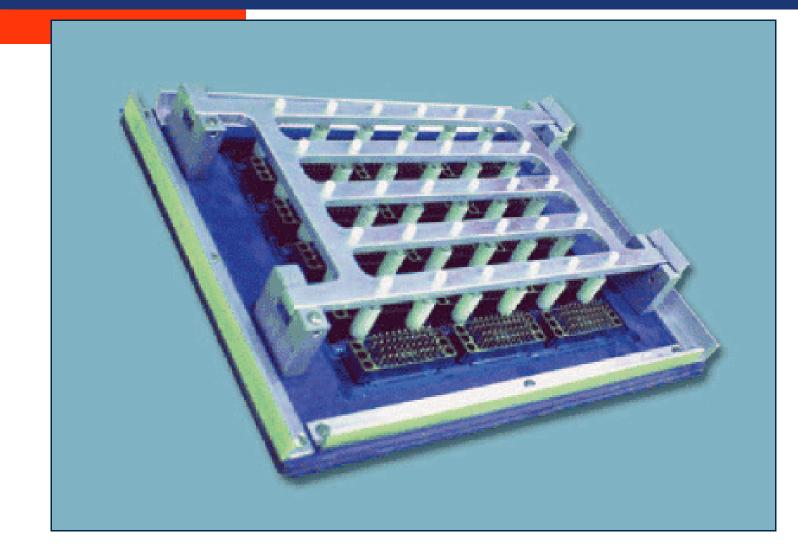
Masking pallet firmly holds the board in place from top side.
